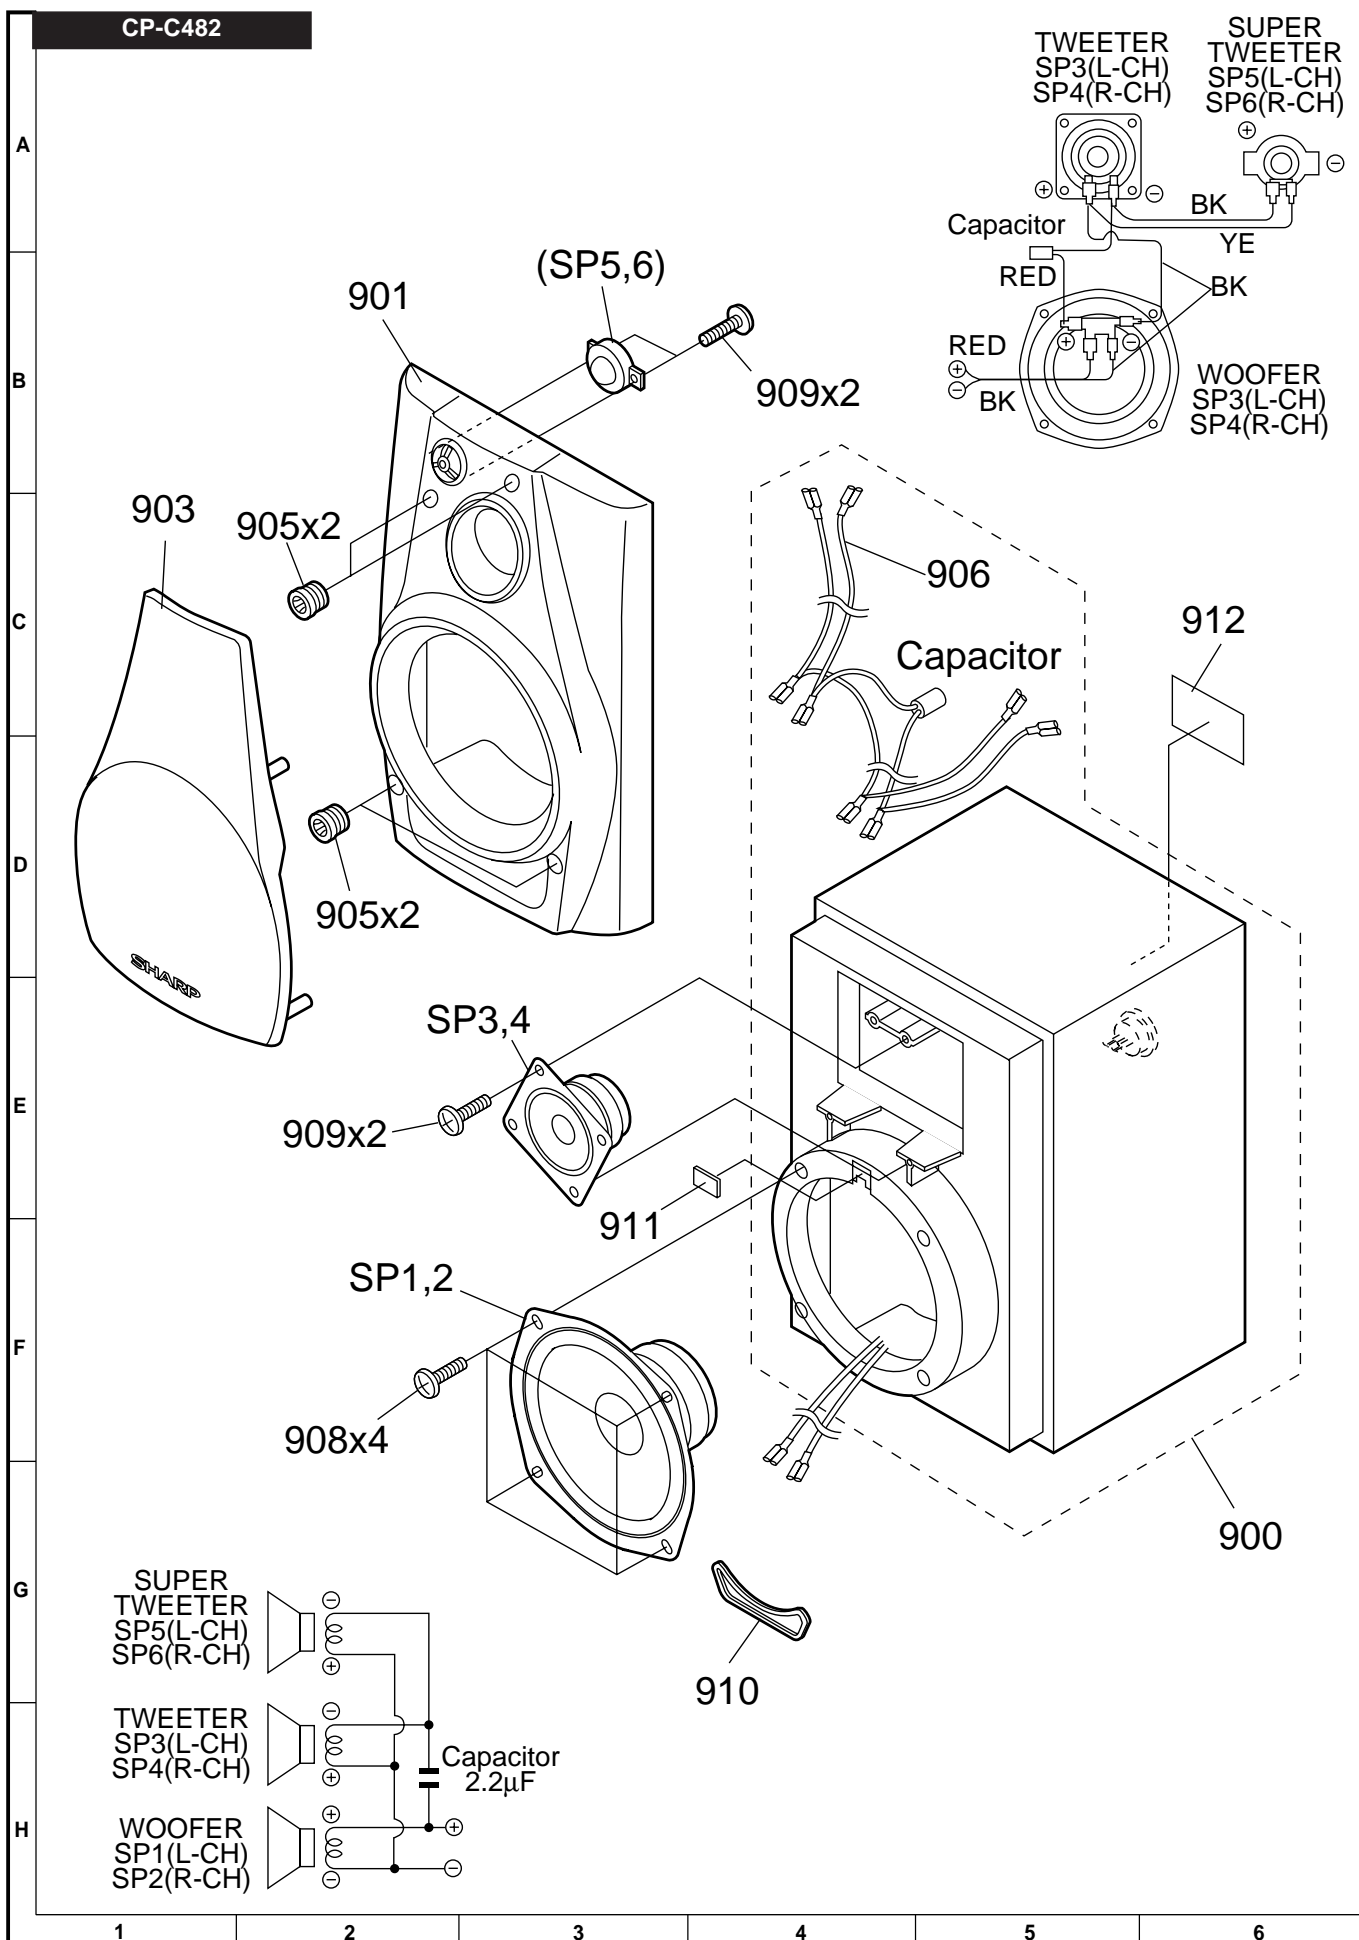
SPEAKER EXPLODED VIEW (1/2)
